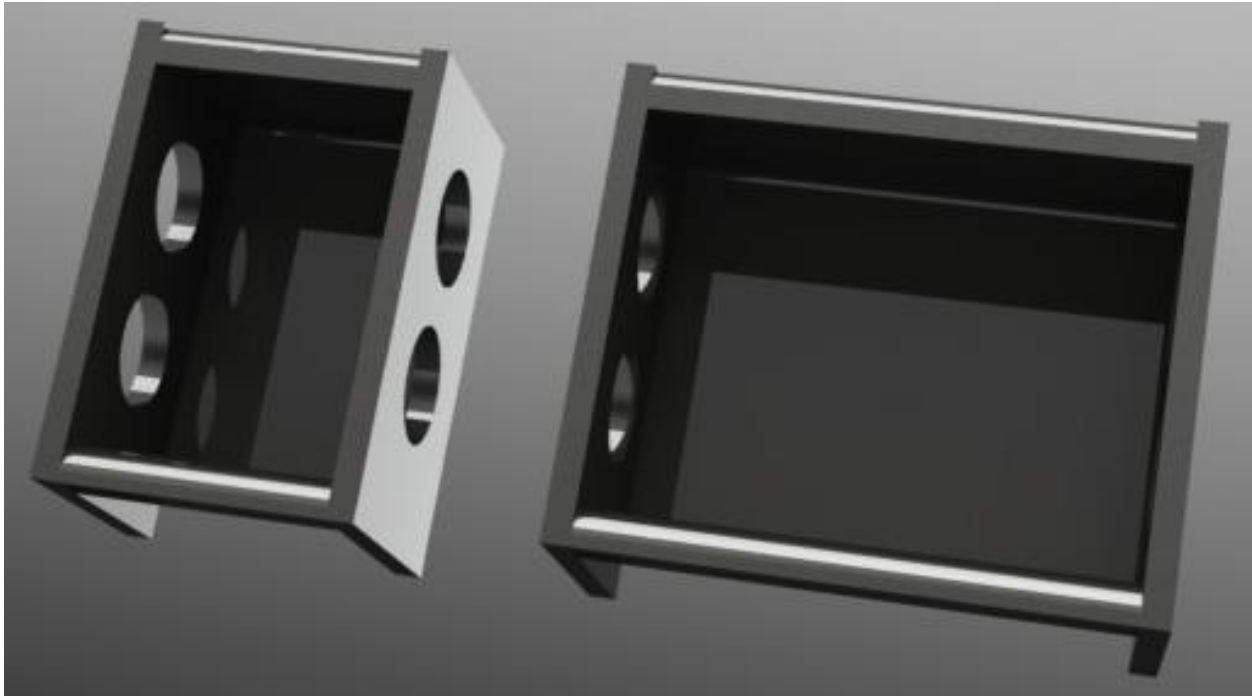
Gear Case Length Difference From Current Gear Design (right) to Improved Design (left)
